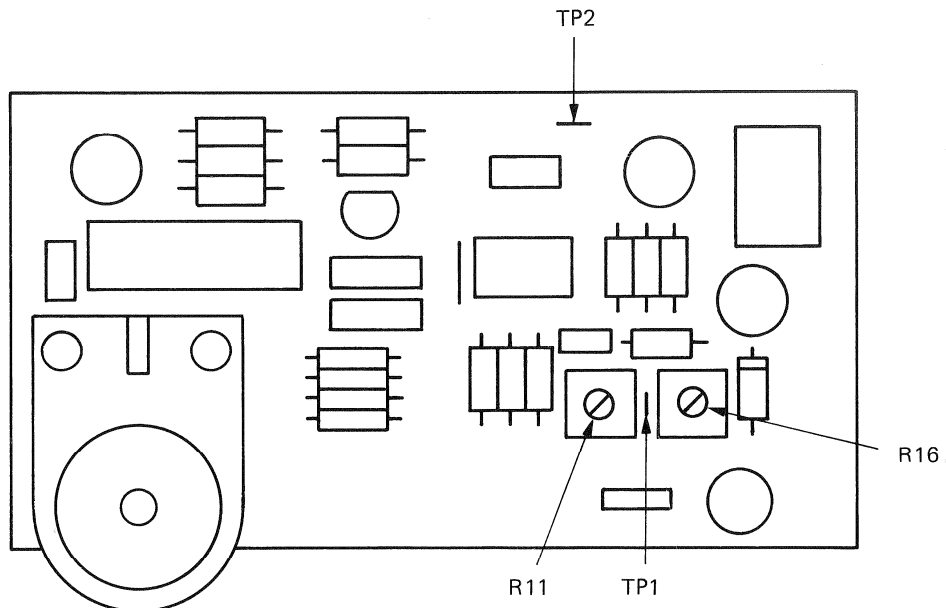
Tape tension sensor PCB 1.727.320
